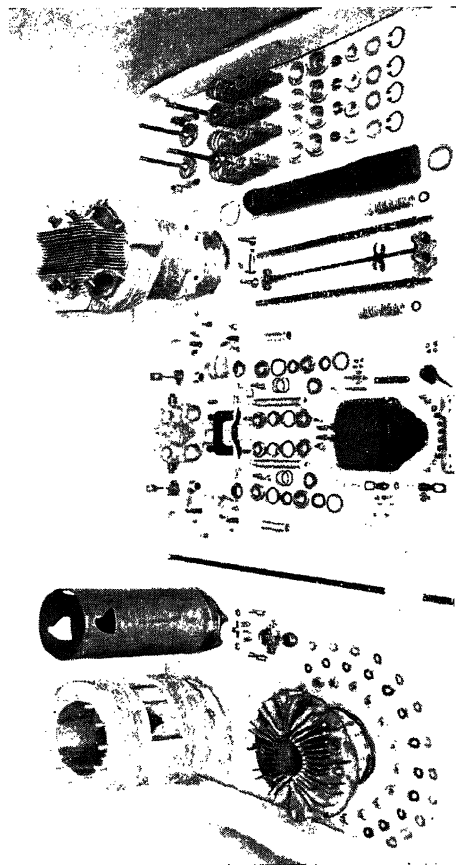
Illustrating the relatively small number of cylinder unit parts of the sleeve valve engine (L.H. side) as compared with poppet valve engine (R.H. side).
